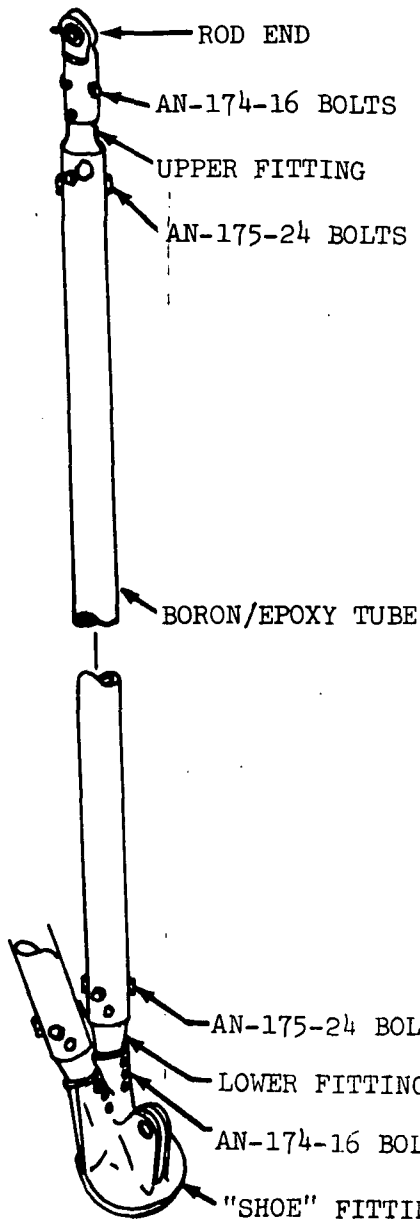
ASSEMBLY TEST OF SKID GEAR INSTALLATION
